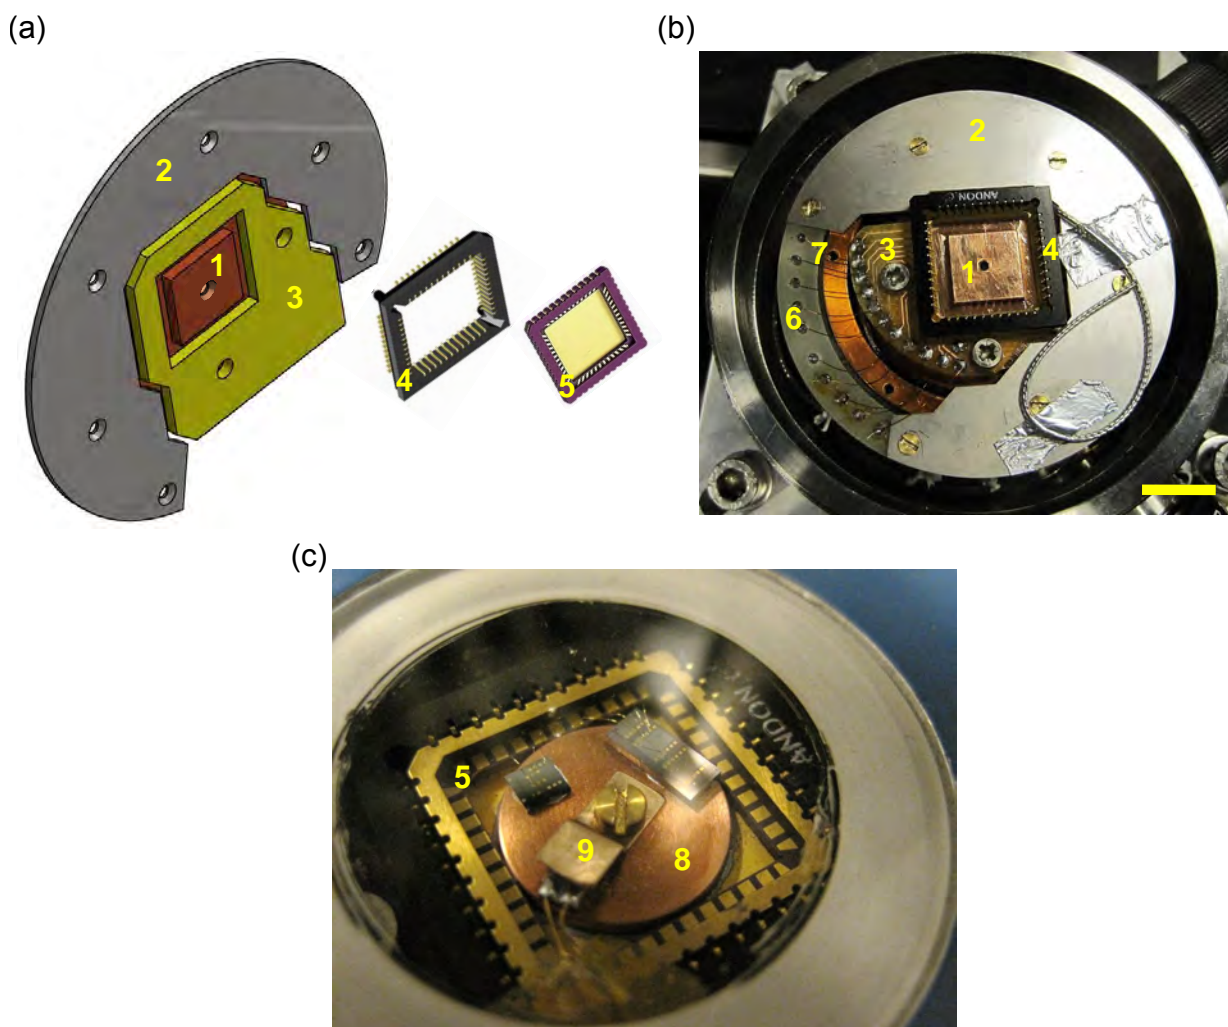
Images of a custom-made holder for samples with electrical contacts. (a) Sketch of an assembly of the main sample holder parts: customized cold-finger (1), radiation shield (2), PCB (3), LCC socket (4) and a chip carrier (5). (b) Top view of the installation inside a liquid-helium flow cryostat chamber. A radiation shield (2) is modified to accommodate a customized PCB (3), which is connected to electrical feedthroughs inside the cryostat (6) via wires with high thermal resistivity (7). The PCB is tightened on a modified cold-finger piece (1). Finally, an LCC socket (4) is soldered onto the PCB. The yellow scale bar is around 1 cm. (c) Image of the removable sample holder, made of an LCC chip carrier (5) with a copper inset (8), and placed in the flow cryostat. The holder is inserted into the LCC socket and tightened to the cold-finger by a screw. Optionally, a copper clamp (9) can be used to secure the temperature sensor. The three images in (a) are the courtesy of Dennis W. Wistisen, Andon Electronics Corp., and Kyocera, respectively.
